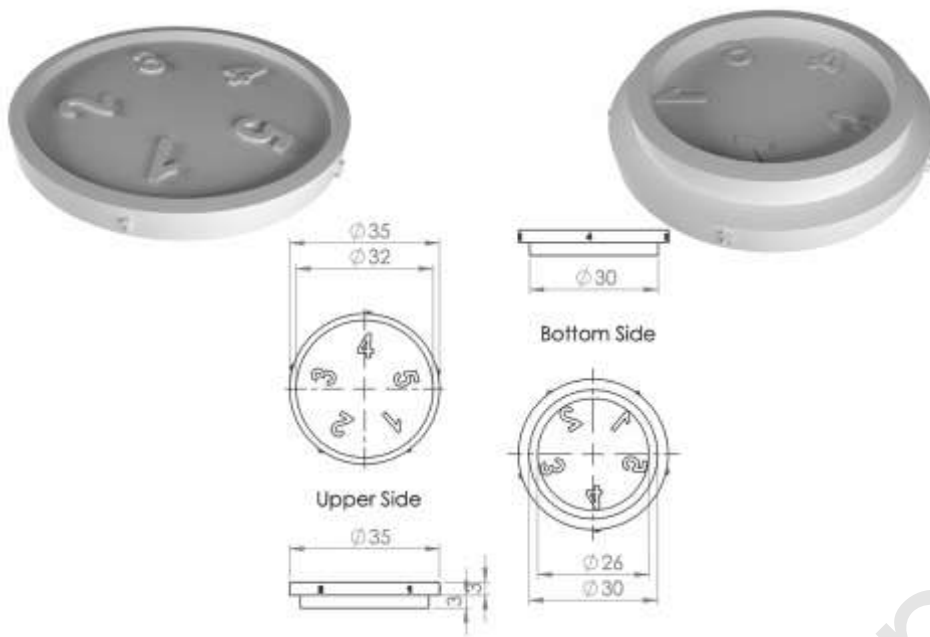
3D model of the holder. Upper, side and bottom view dimensions of the holder design.
